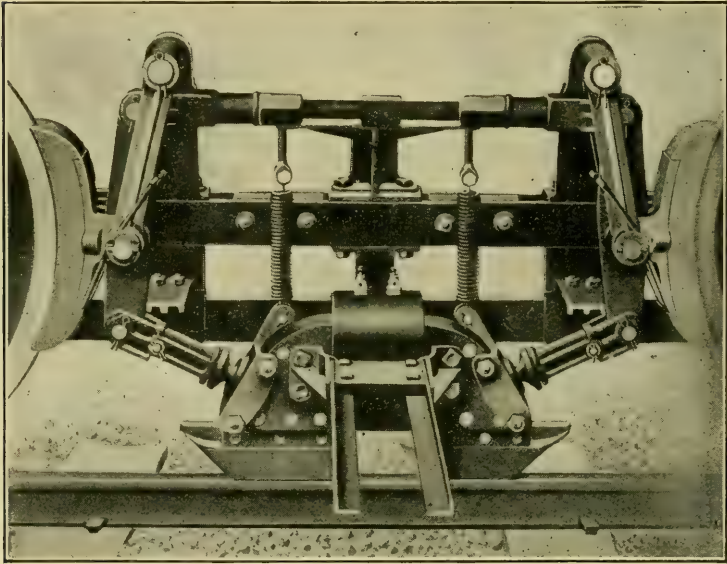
General View of Braking Equipment Taken from under the Car.
